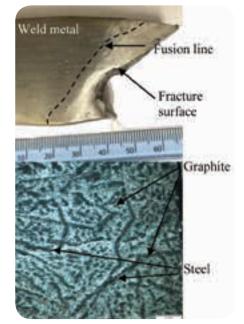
Failure of sample 4 through the graphitised HAZ. a) the fracture profile in relation to weld metal. b) the fracture surface (original magnification 8×).
